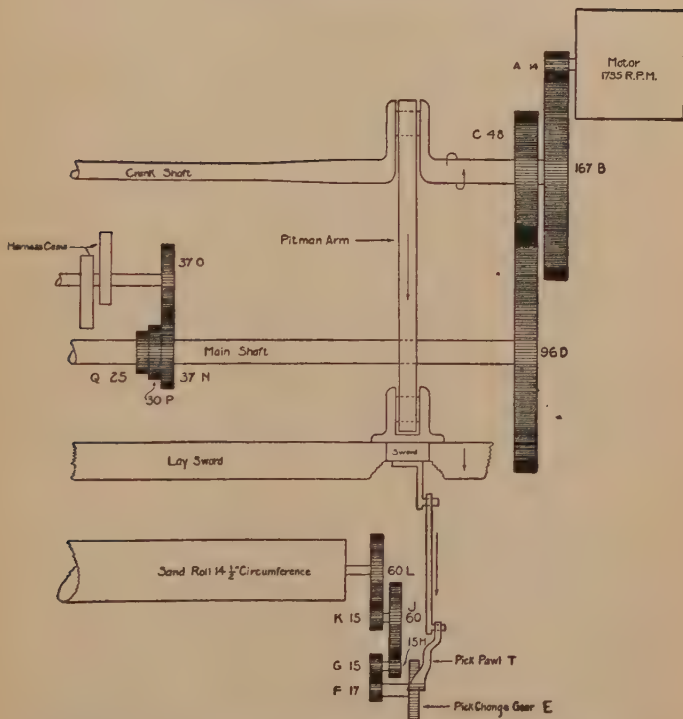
TAKE-UP GEARING OF A LOOM WITH A PICK PAWL TAKE-UP
